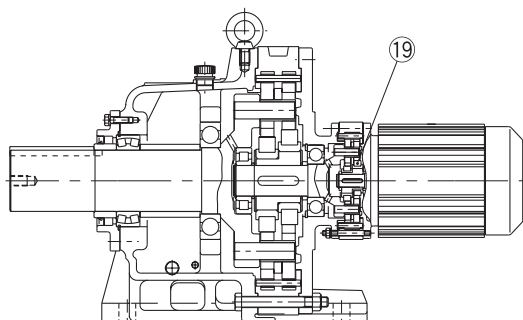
Type CHHM (Horizontal, Gearmotor)
